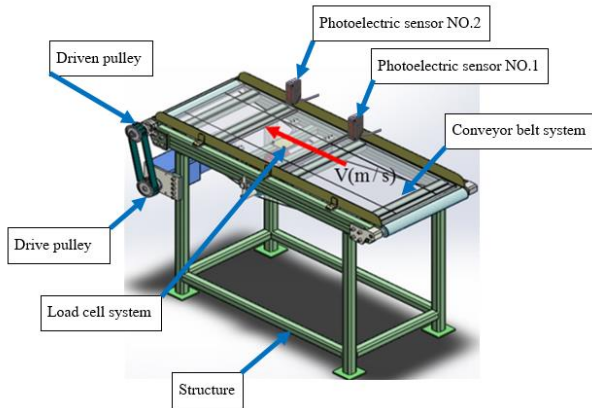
The conveyor belt of weight measurement system (conveyor belt NO.1).
